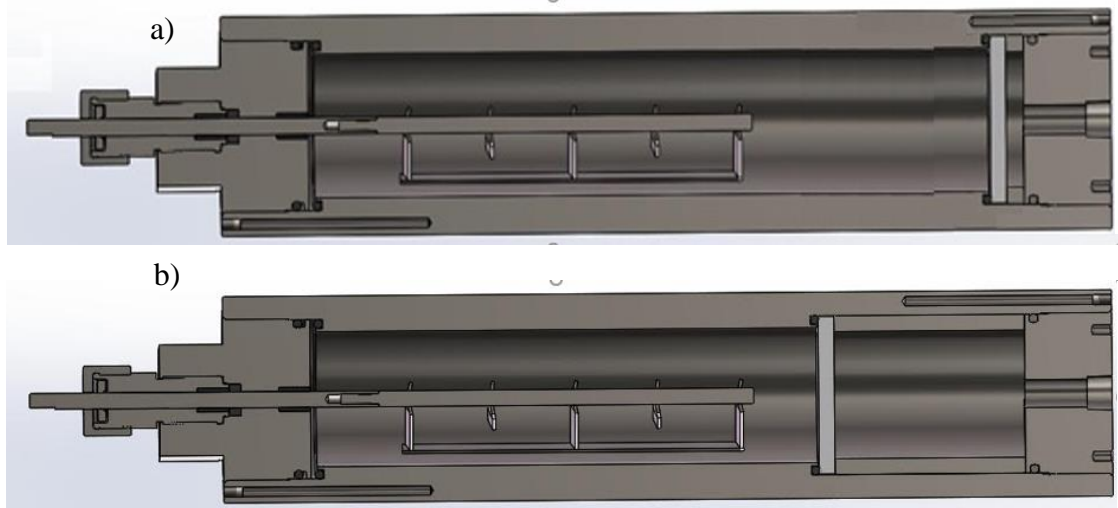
The testing cell of the second apparatus. a) The original from the manufacturer, and b) the modified cell for fracture disc sealing tests.
